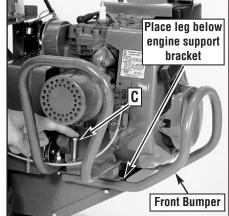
Insert screw (C) down through engine base, engine support bracket and leg of front bumper. Loosely add a lockwasher and nut.
